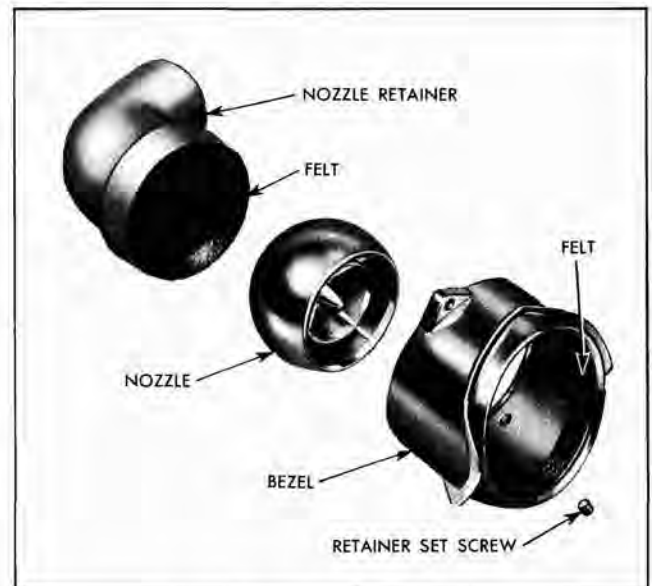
Bezel and Nozzle Assembly—Exploded View
